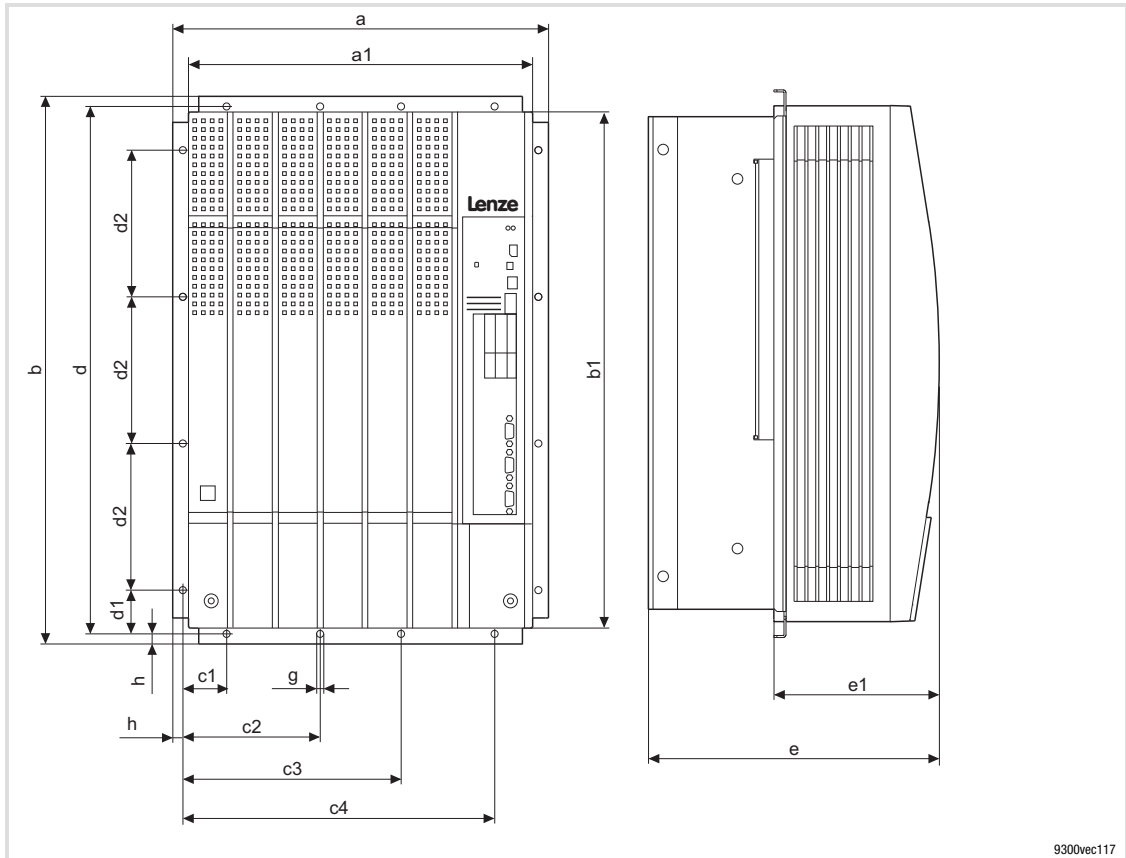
Dimensions for thermally separated mounting 45 kW
